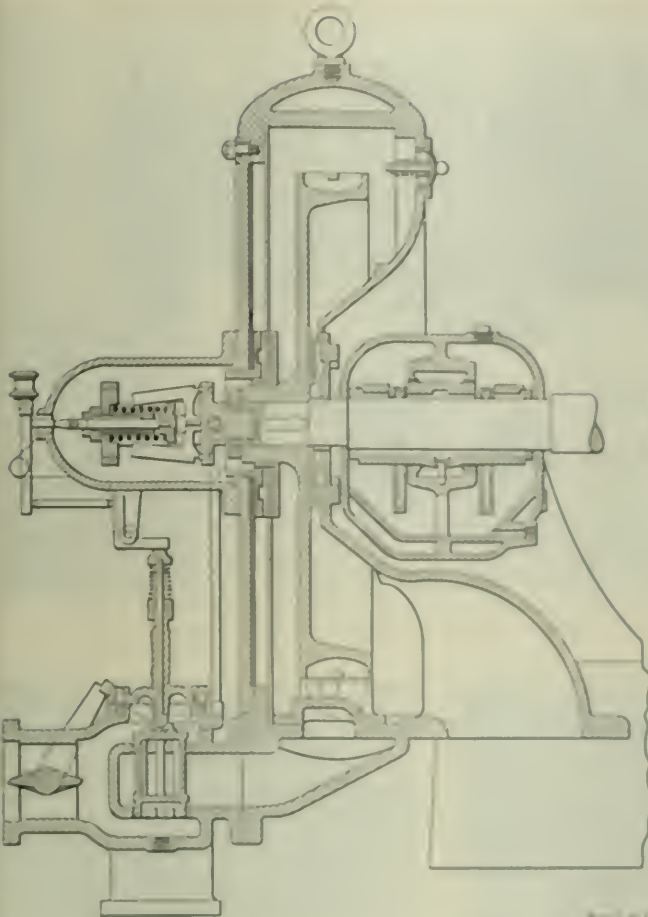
SECTIONAL VIEW OF BLISS TURBINE.
